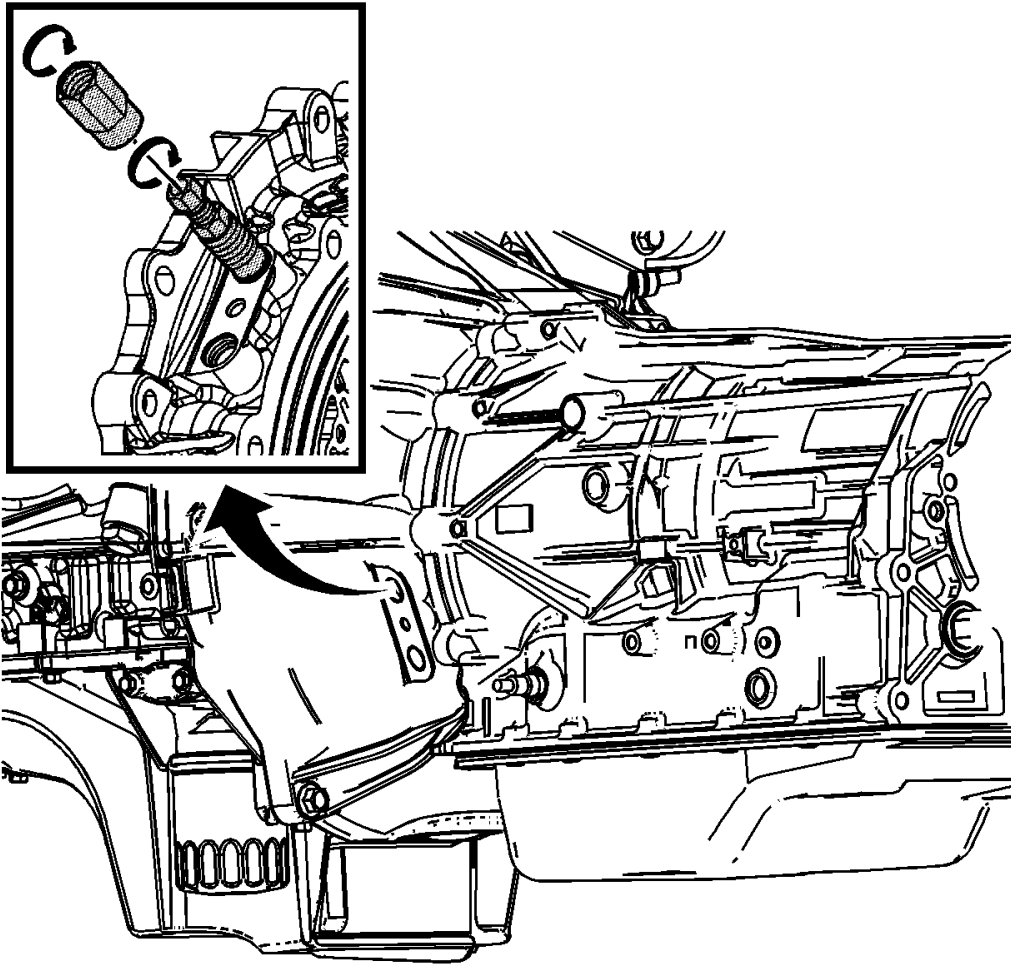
Locating Engine Wiring Harness Bracket Bolt And Ground Wire Bolt
